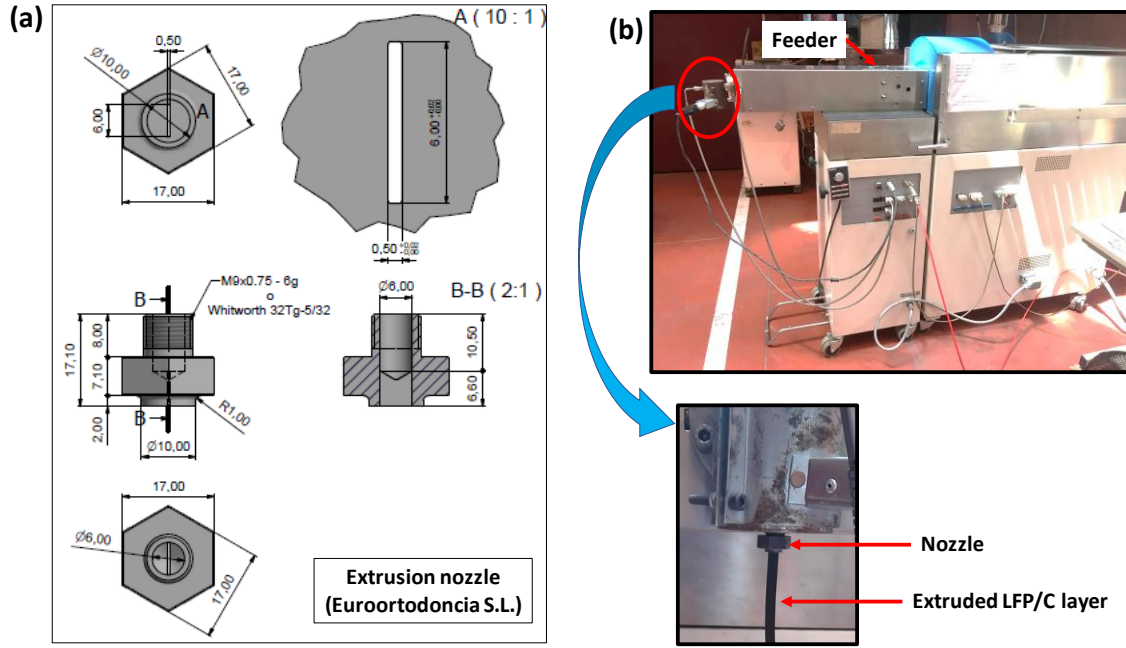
6. (a) Home-design extrusion nozzle of 0.5 mm thickness. (b) Single-screw extruder machine for LTO and LFP films extrusions.
